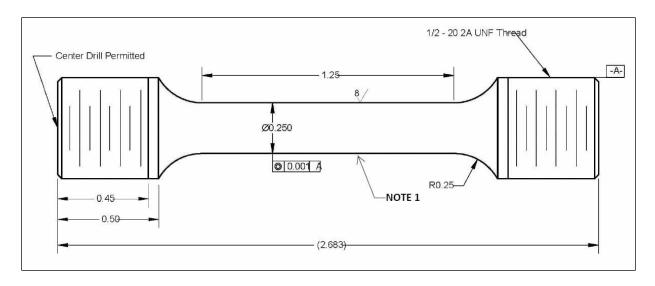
Tensile specimen drawing used for evaluating CP Ti extruded bars.
